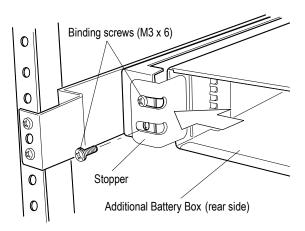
Fixing the Rear Side of the Additional Battery Box (HP rack frame)
